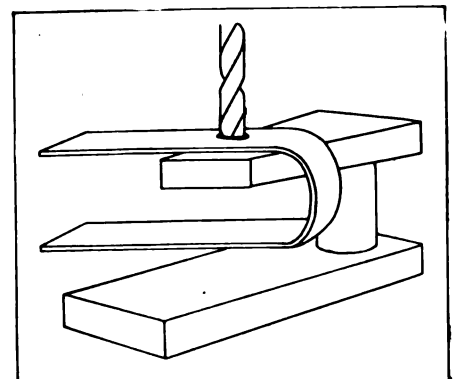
Practical Drilling Block Made from Section of Old Crankshaft.
